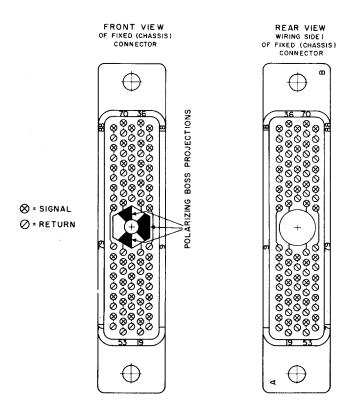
Contact Arrangement for Preferred 88 Pin Auxiliary Connector
